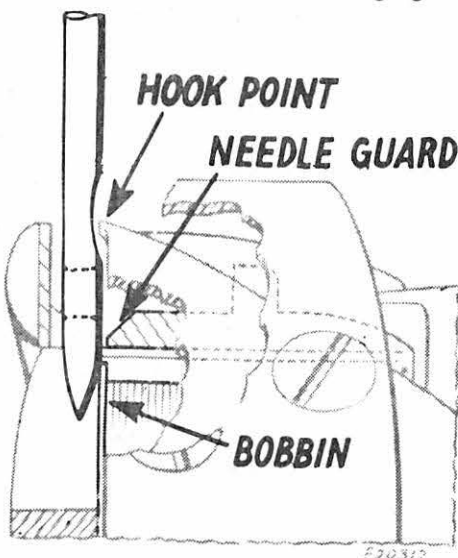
Showing Needle Striking Bobbin Due to Removal of Too Much Metal from Needle Guard
